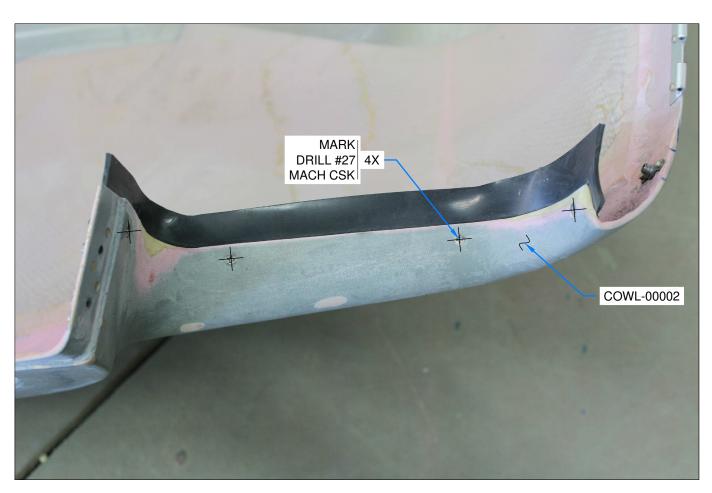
DRILL BOTTOM COWL (LEFT SIDE SHOWN WITH SEAL INSTALLED)
